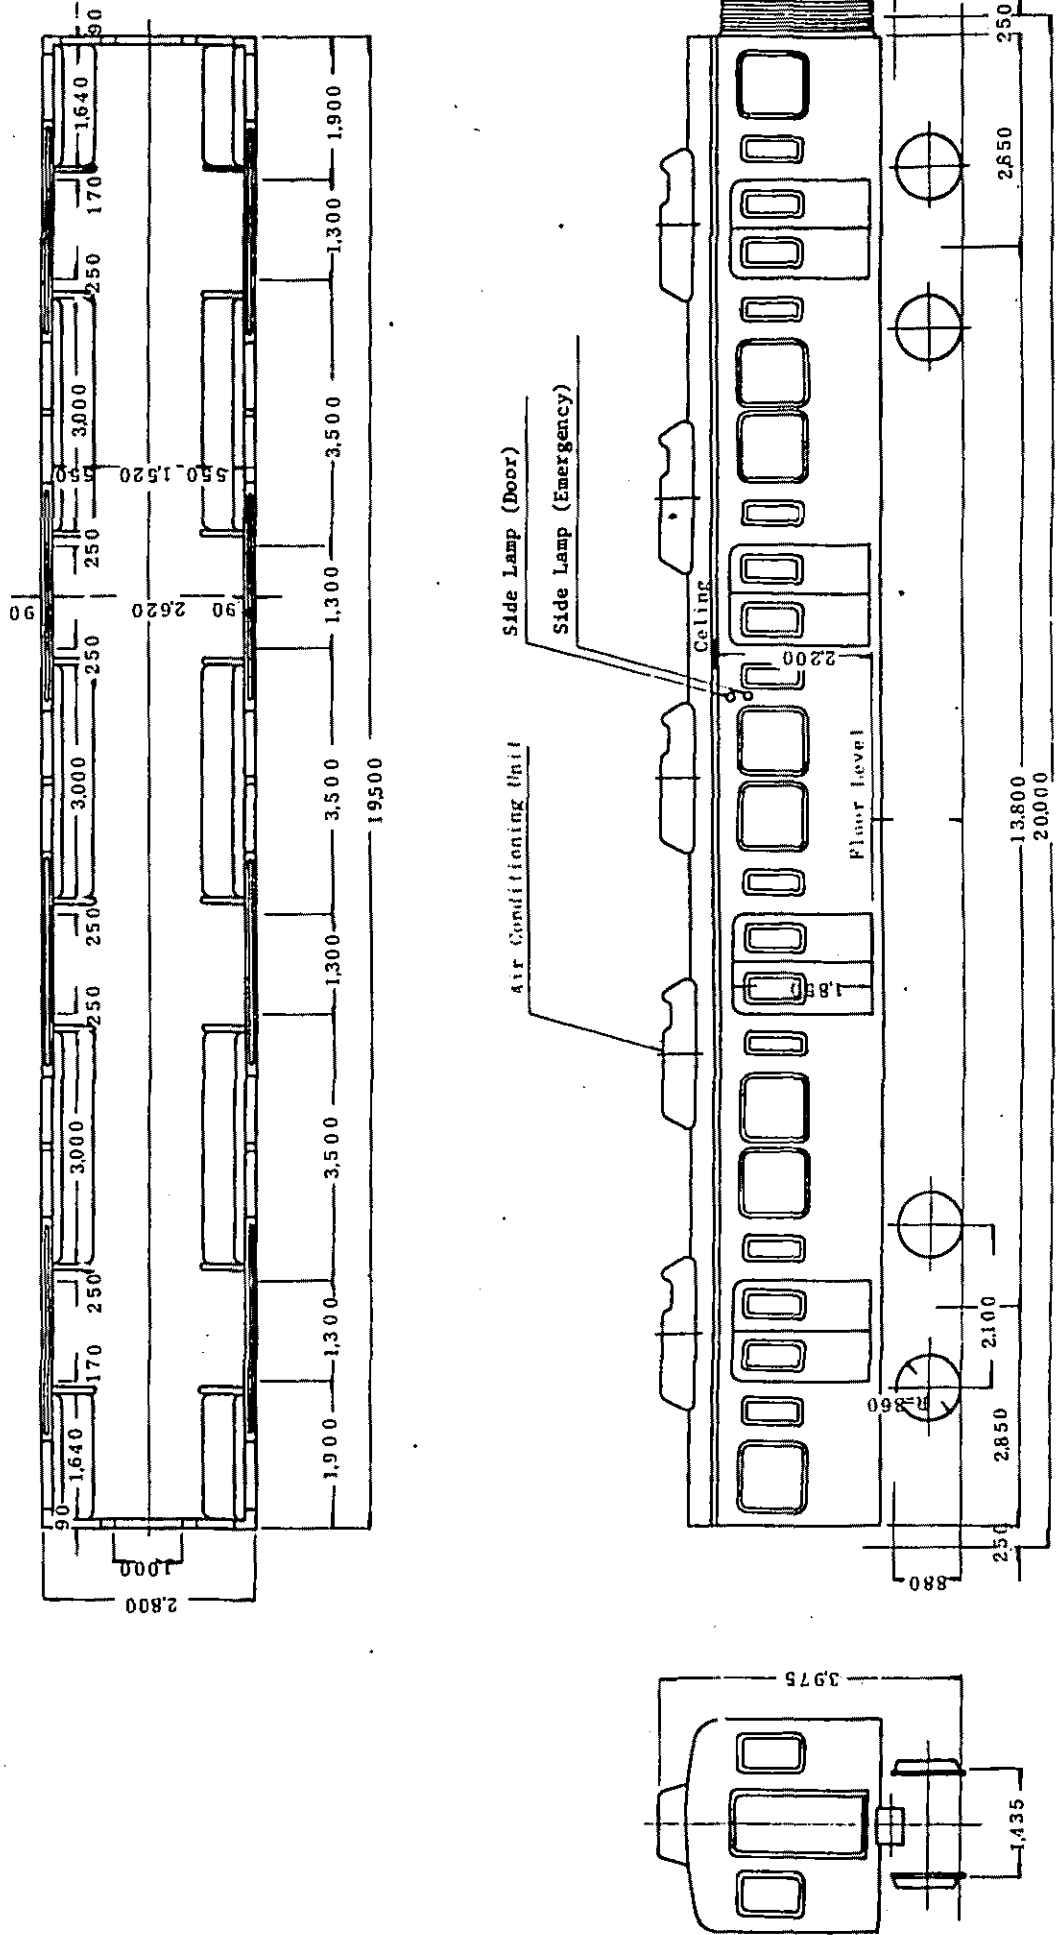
Plan and Sectional Elevation of Intermediate Car
